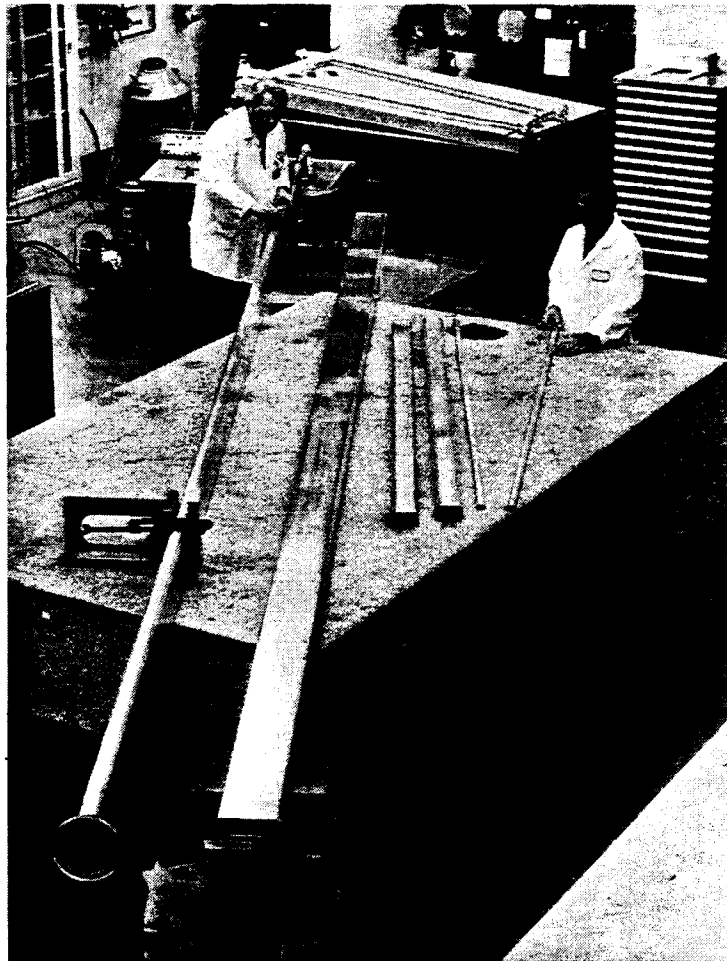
Photograph of prototype dipole chamber (long) and quadrupole chamber (short) extrusions being dimensionally inspected at SLAC.
